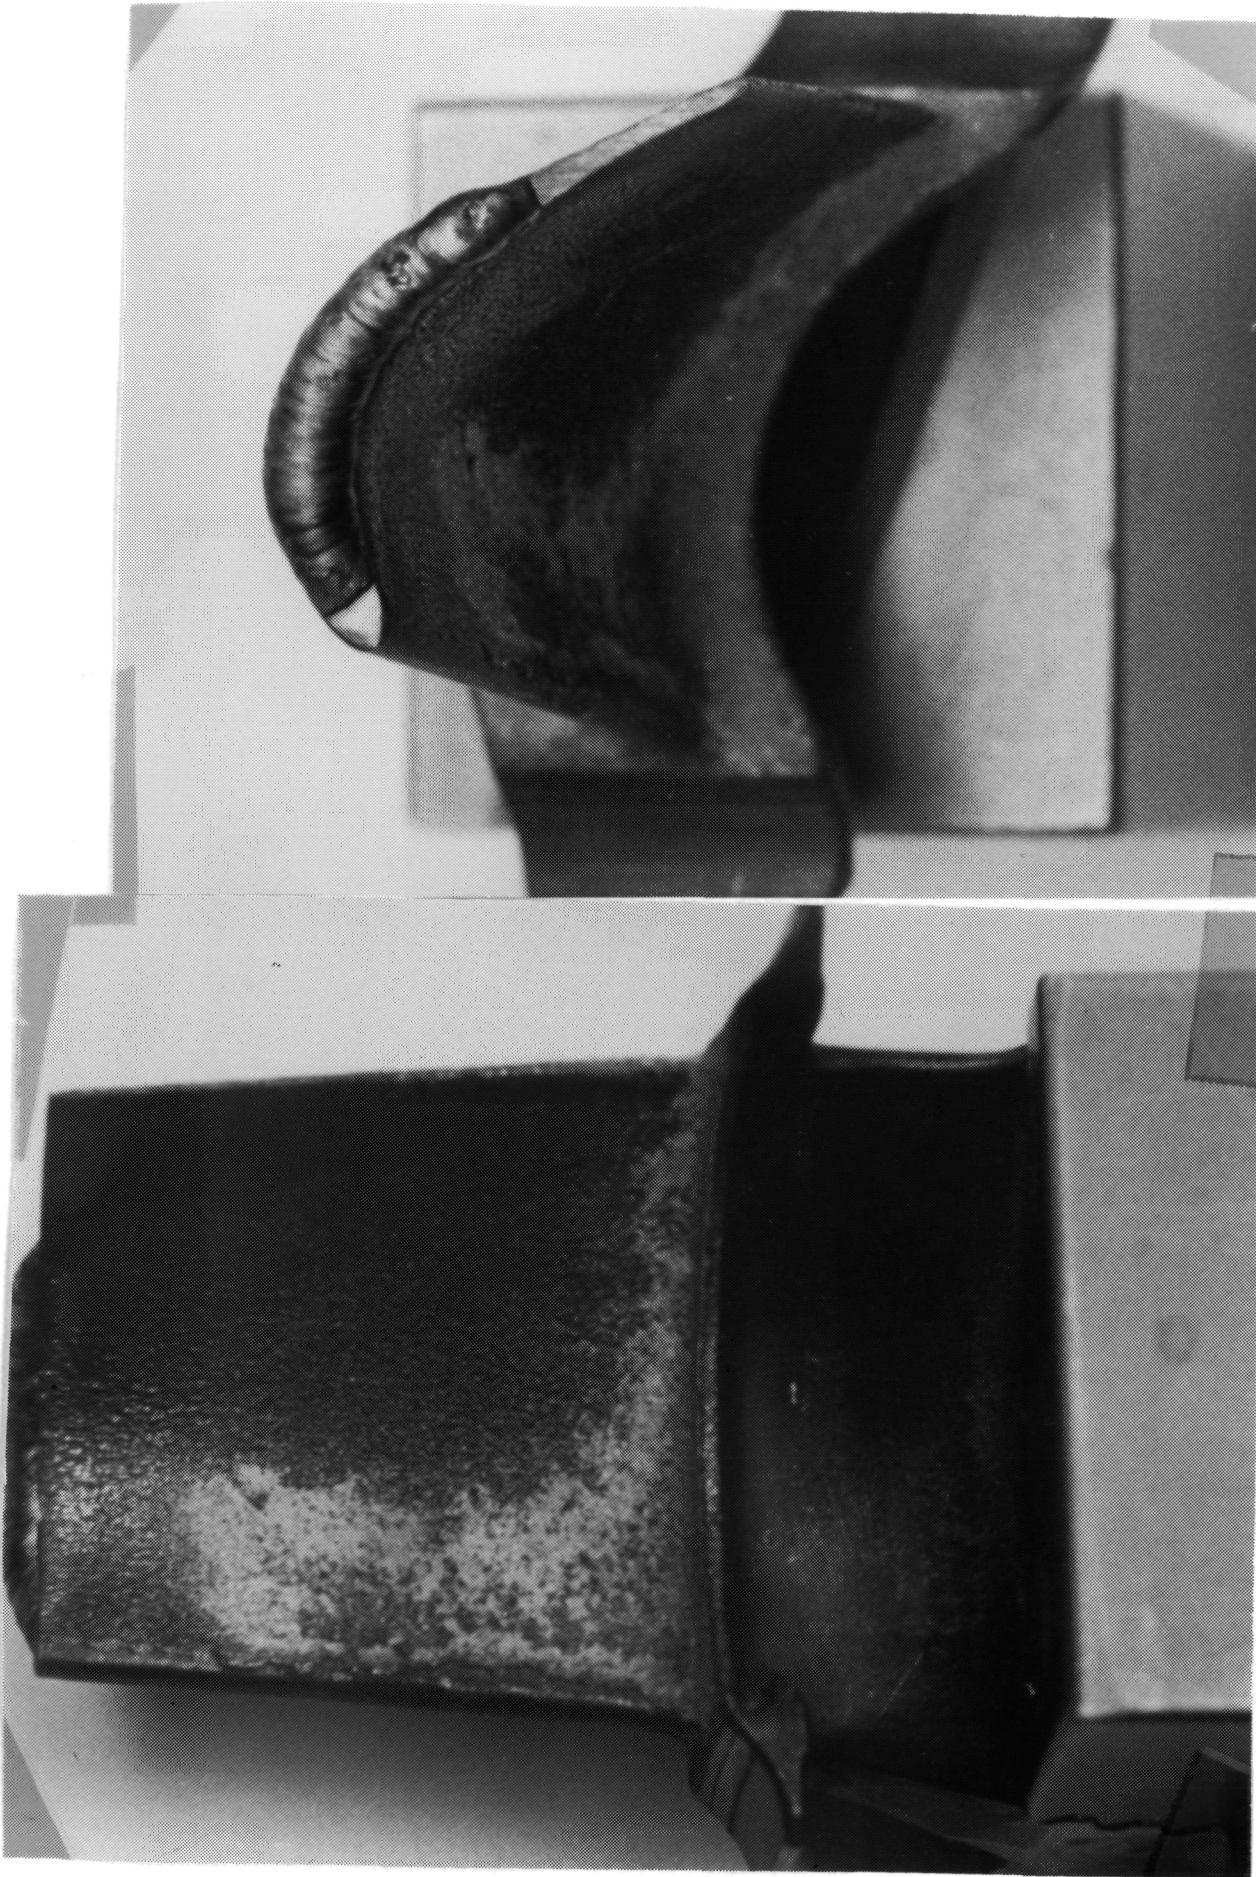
Cobalt Weld Beads on Blade Tips
